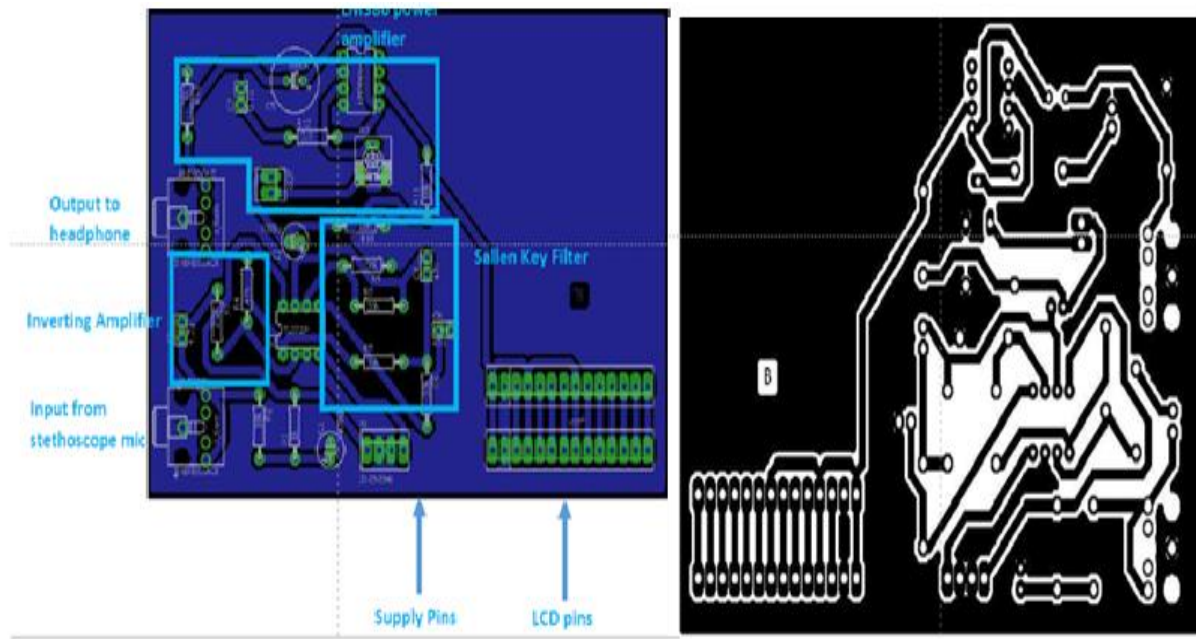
PCB Design in Dip trace software (Front and Back View)
